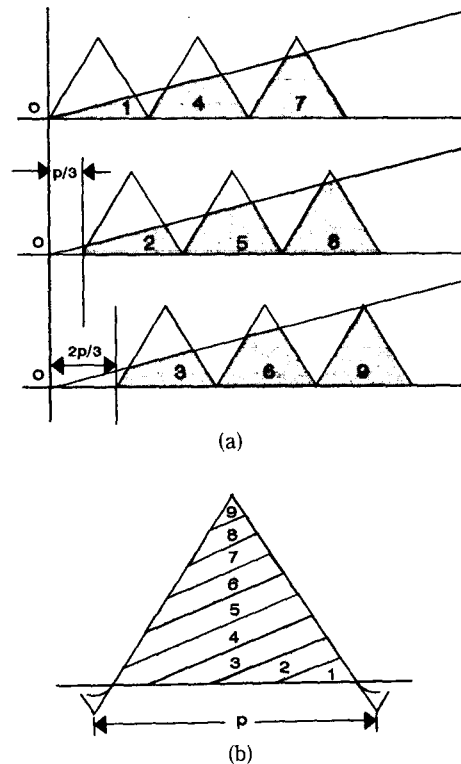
(a) Positions of cutting faces on the chamfer of a tap
